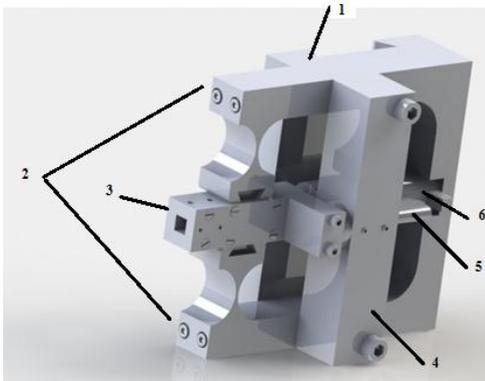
Schematic view of the ATh parts: (1) actuator mount, (2) flexural bearings, (3) tool holder (4) sensor mount, (5) capacitive sensor, and (6) piezoelectric actuator.
